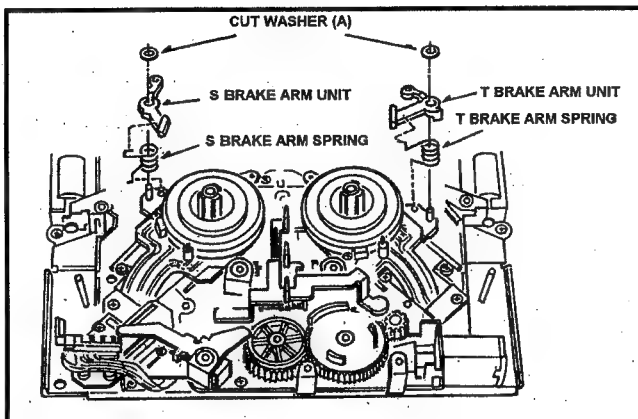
Removal of S & T Brake Arm Unit
